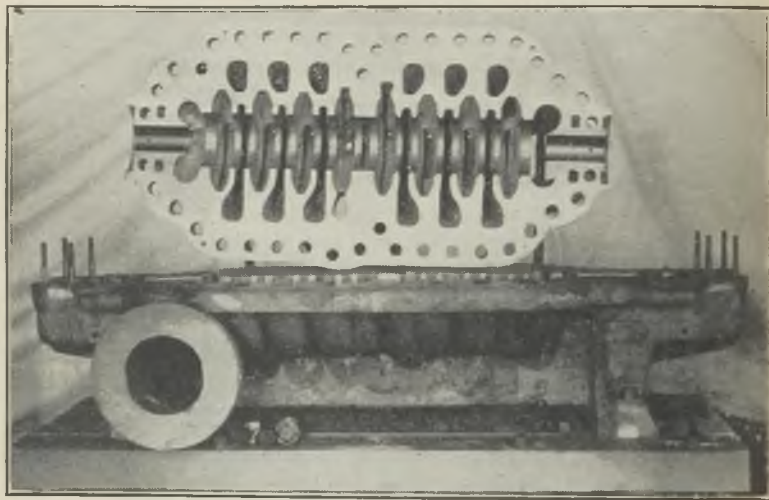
SIX-IN., 8-STAGE CENTRIFUGAL-PUMP CASINGS OPERATING AT 1,000-LB. PER SQ. IN. PRESSURE ON PETROL.
